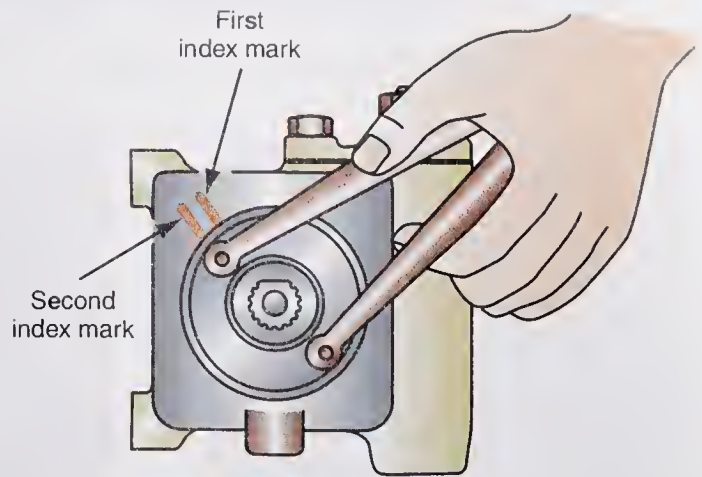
Aligning adjuster plug hole with the second index mark placed on steering gear housing.
